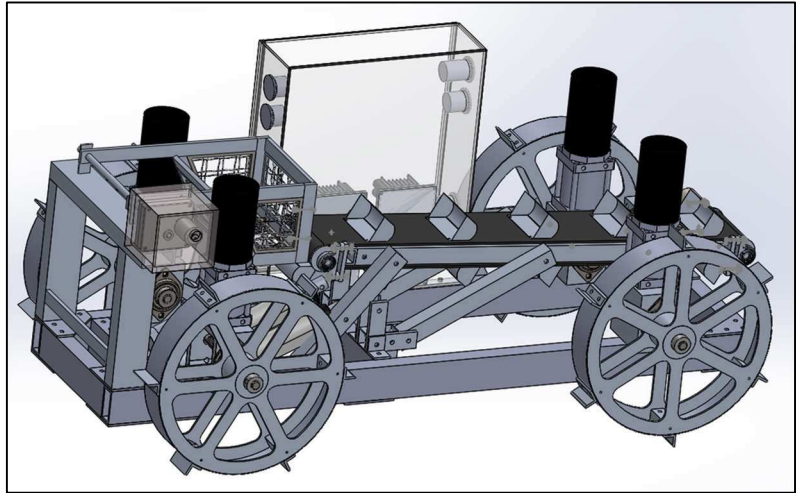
Completed CAD of SCOOPS shows a clearance of all components.
